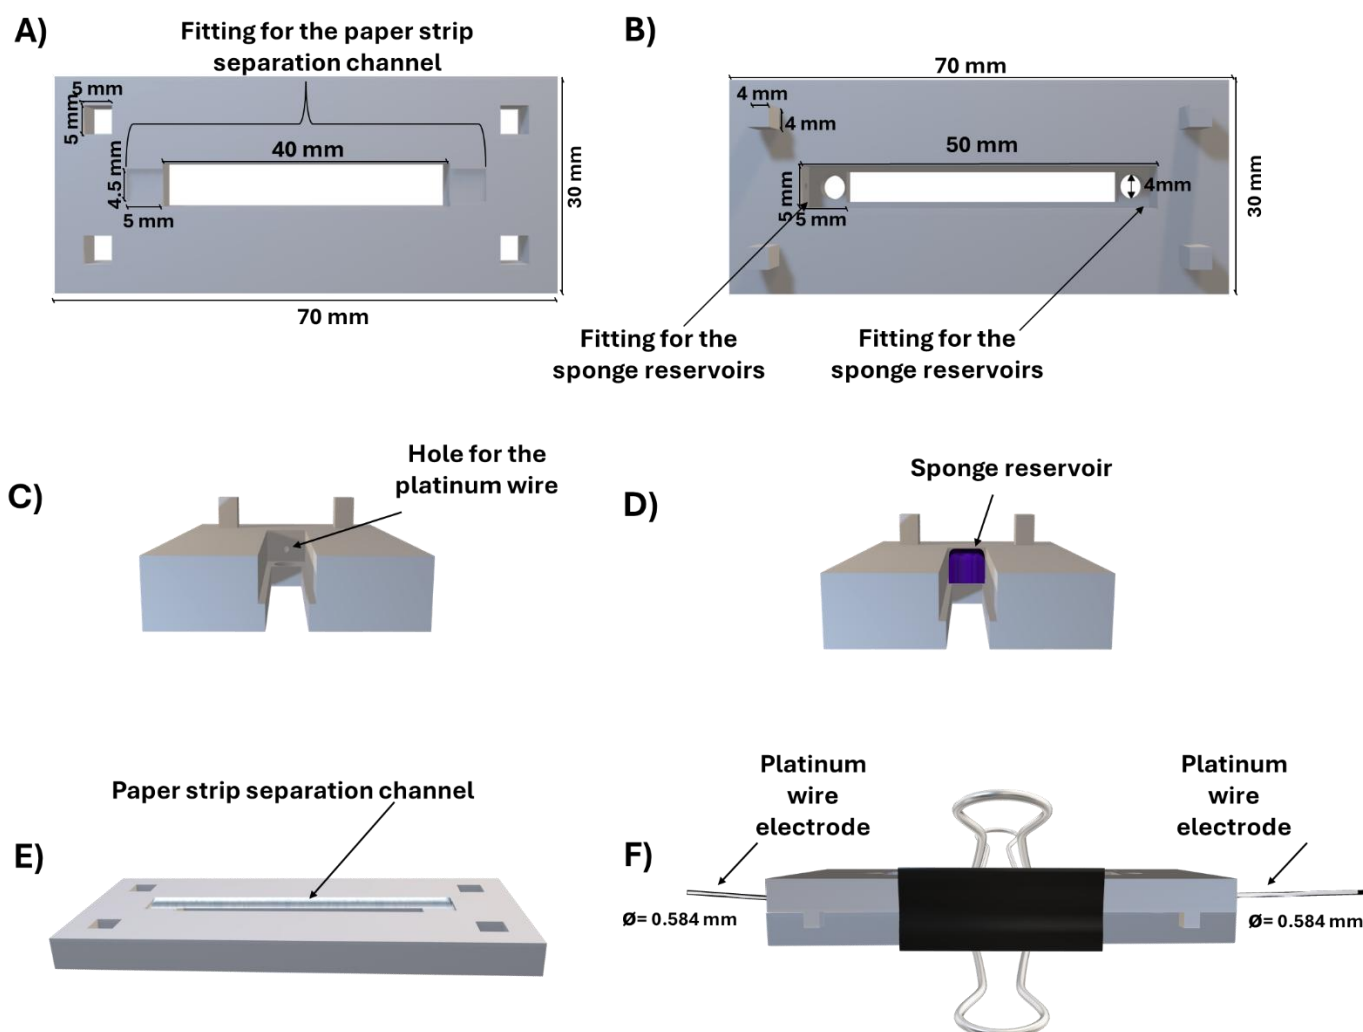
Scheme of the designed 3D printed holder: A) Bottom piece; B) Top piece; C) Cross-section of the top piece showing the hole for the platinum wire electrodes; D) Cross-section of the top piece showing the sponge reservoir; E) Bottom piece showing the paper strip separation channel fit; F) Holder assembled with a paper clip.
